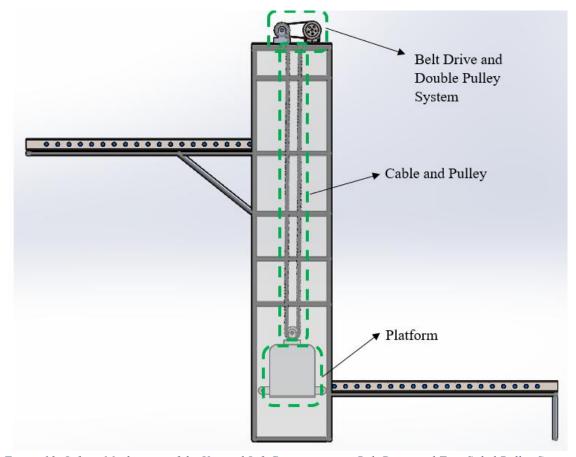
Lifting Mechanism of the Vertical Lift Conveyor using Belt Drive and Two-Sided Pulley System
